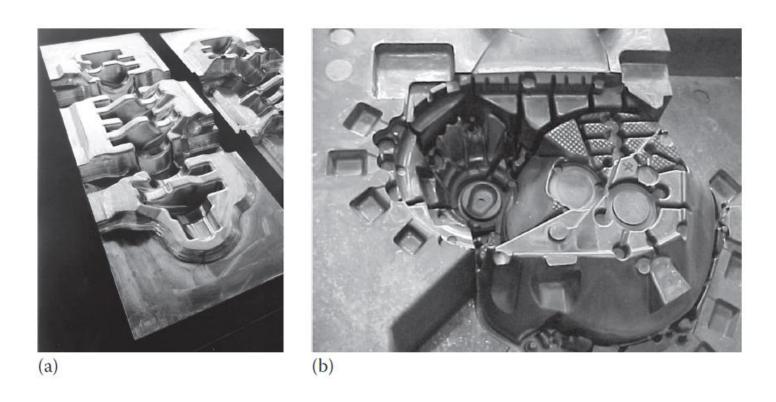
Examples of hot-working dies, for application in (a) hot forging, used to produce crankshaft, and (b) die-casting, to cast an aluminum gearbox cover. (From Canale, L.C.F. et al. (eds.), Failure analysis of heat treated steel components, in: *Failure Analysis in Tool Steels*, Mesquita, R.A. and Barbosa, C.A., eds., American Society for Metals (ASM), Materials Park, OH, 2008, vol. 1. Chapter 11, pp. 311–350.)
